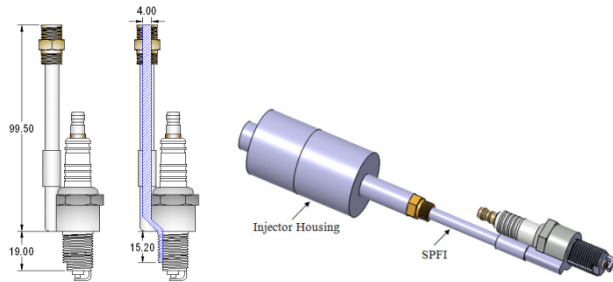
(Left) Technical drawing of SPFI (units in mm) and (Right) SPFI connected to injector housing
